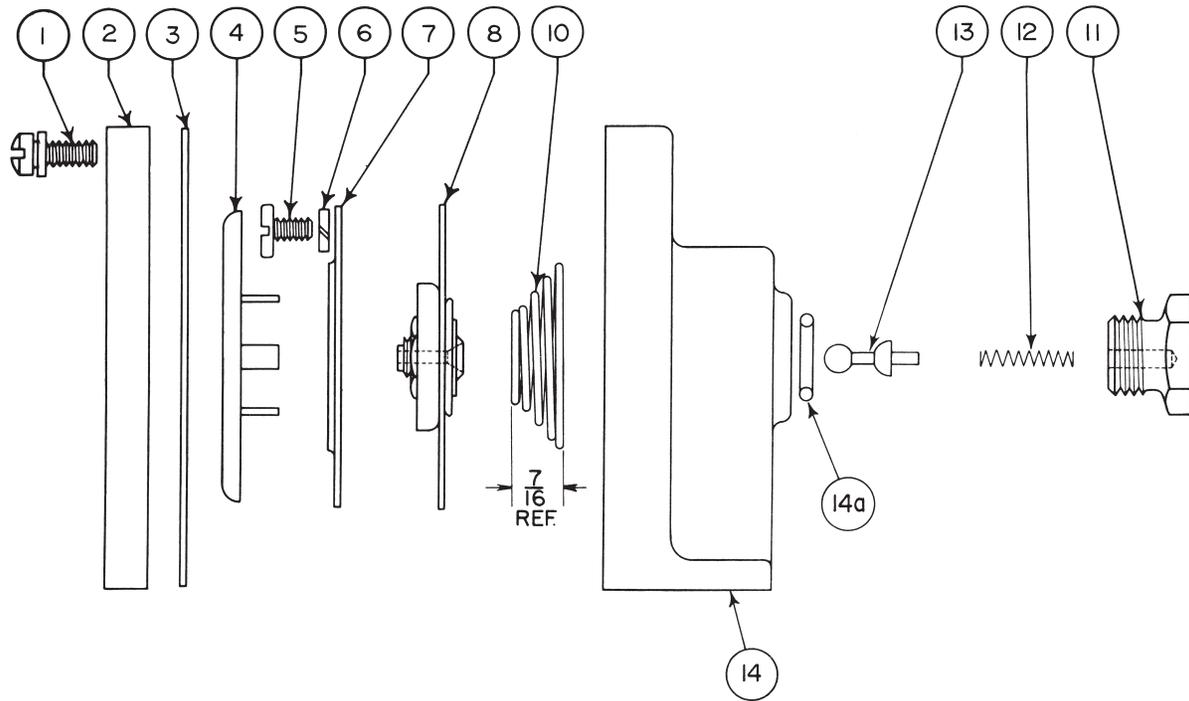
Pneumatic Relay, cross-sectional view, order of assembly/dis-assembly
